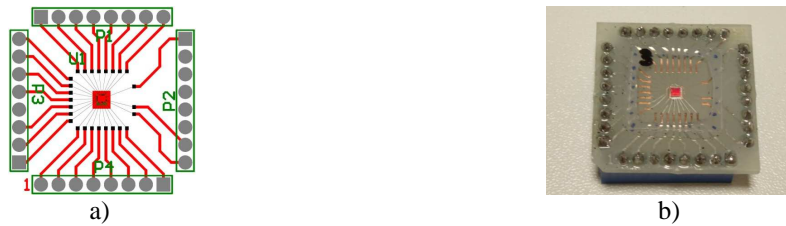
Daughter board: a) PCB layout and bond connections; b) photograph of a fully assembled unit.
